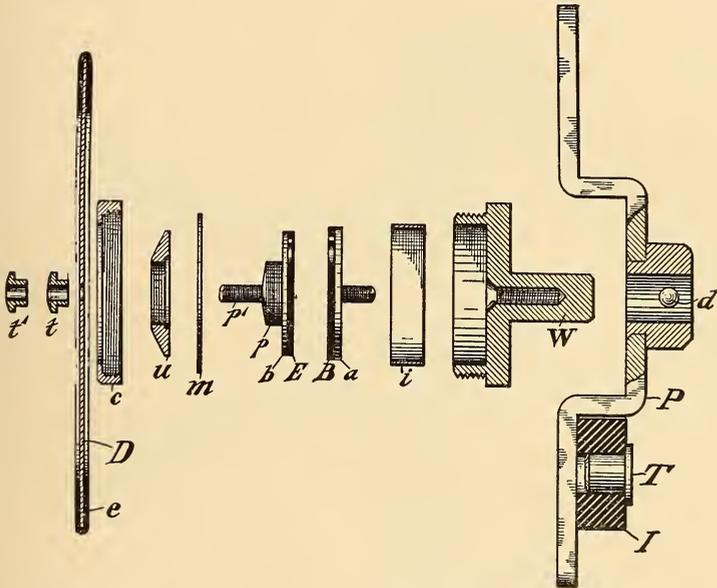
DETAILS OF SOLID-BACK TRANSMITTER.
